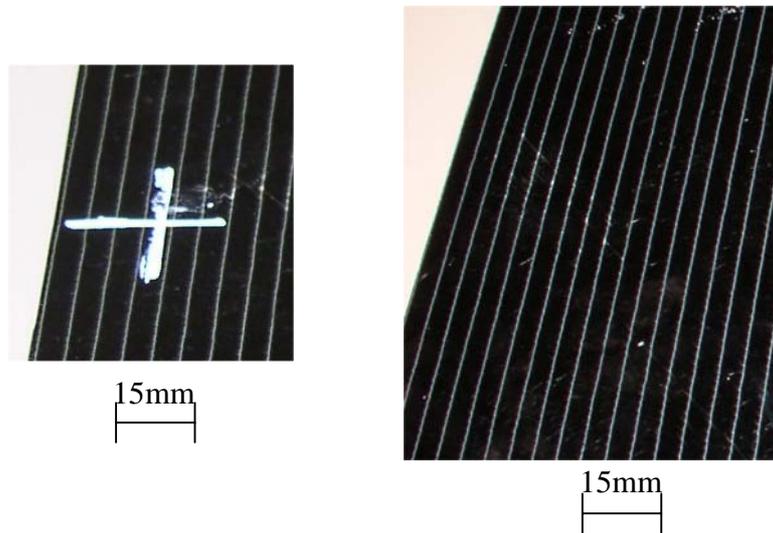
Post impact damage from an edge impacted specimen showing the (left) front face and (right) back face.
